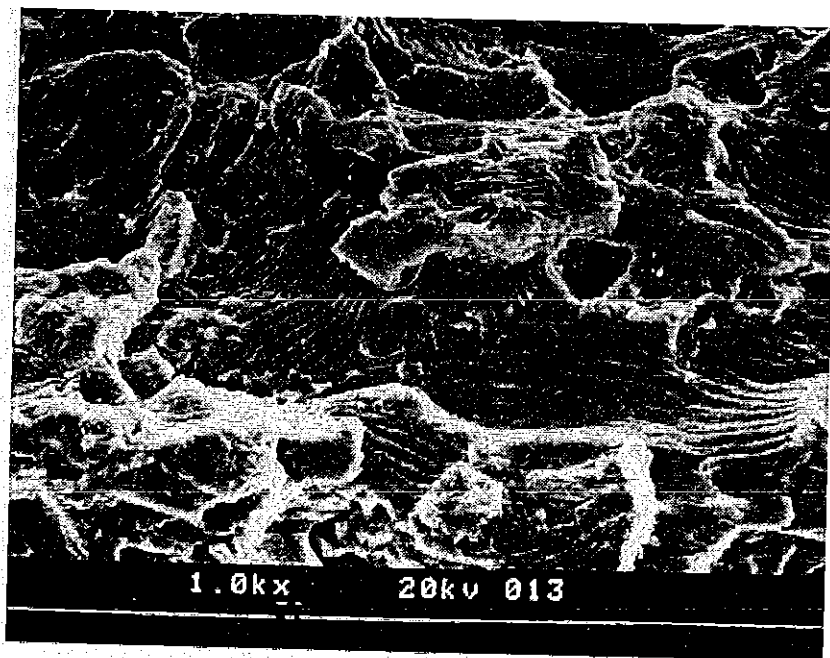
Details of fracture surface below semielliptical crack initiation.
